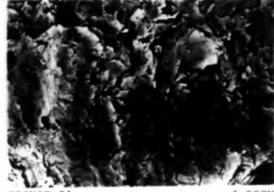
3,200X PATIGUE AND CORROSION ZONE 2.0 INCHES AFT OF ORIGIN.
